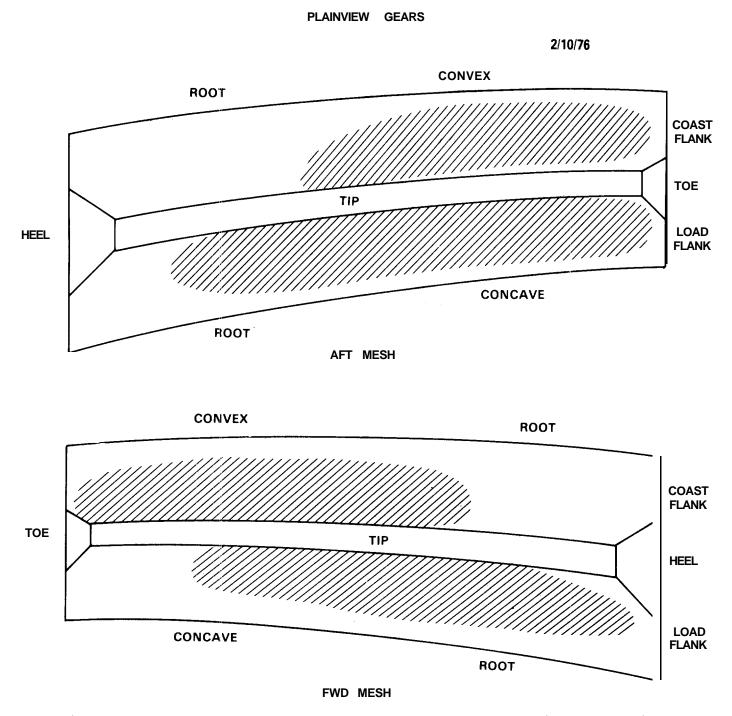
Tooth Contact Pattern: Starboard Upper After Moving Aft Vertical Gear 0.010 inch into Mesh, at 192 Hours of Operation
